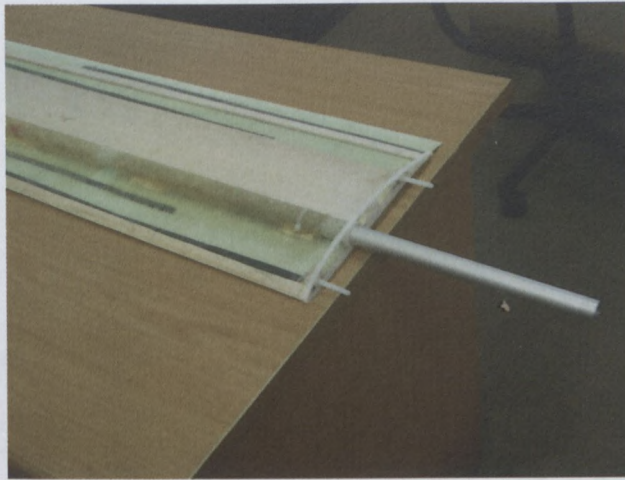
Bottom half of the wing with the aluminium wing spar fixed.
